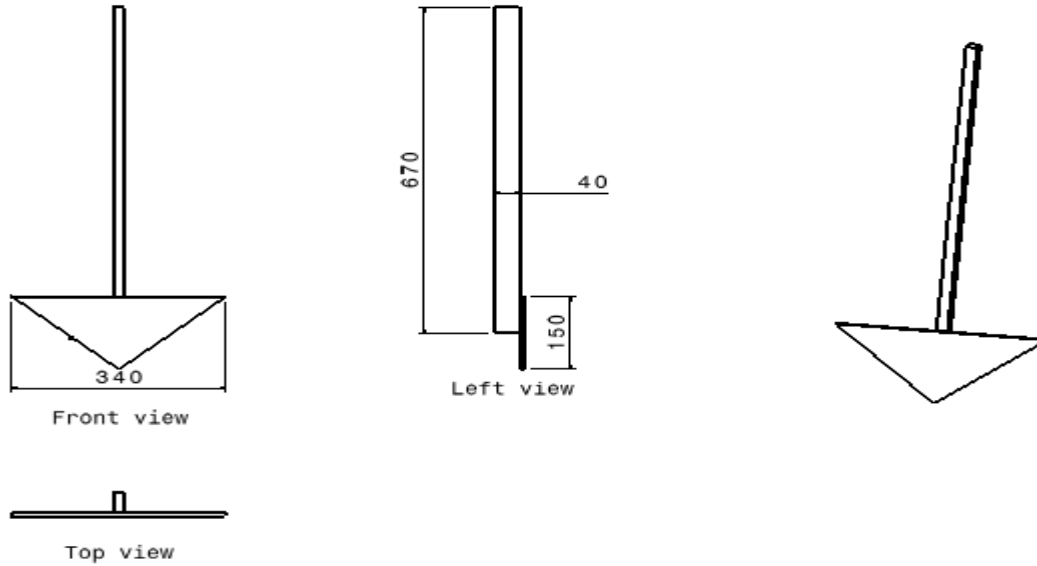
5. Isometric view of furrow opener (all dimensions are in mm)
